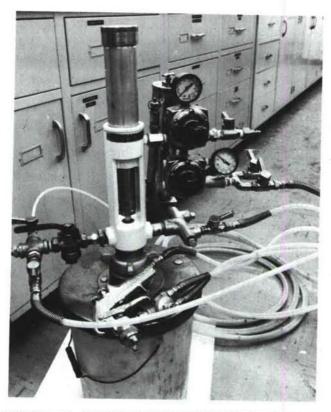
ADHESIVE PRIMER SPRAY EQUIPMENT
